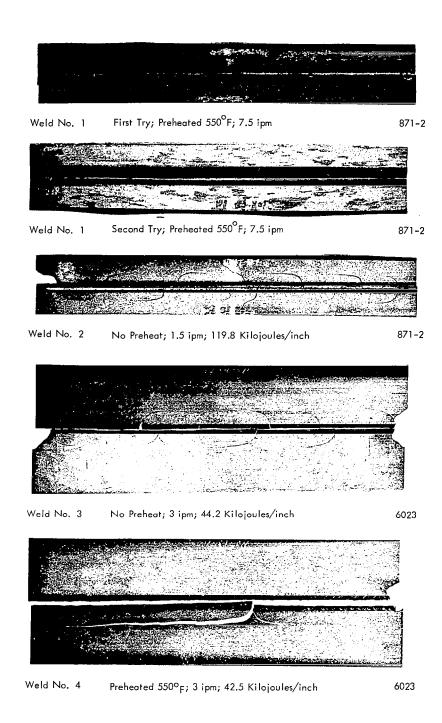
Sylvania "A" GTA Welds
